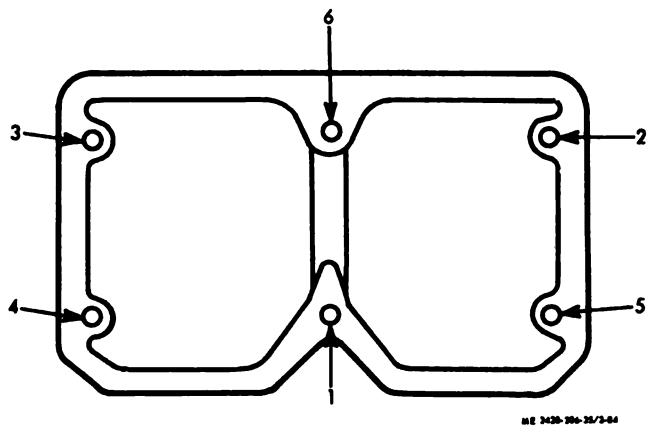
Rocker lever housing cap screw tightening sequence.
